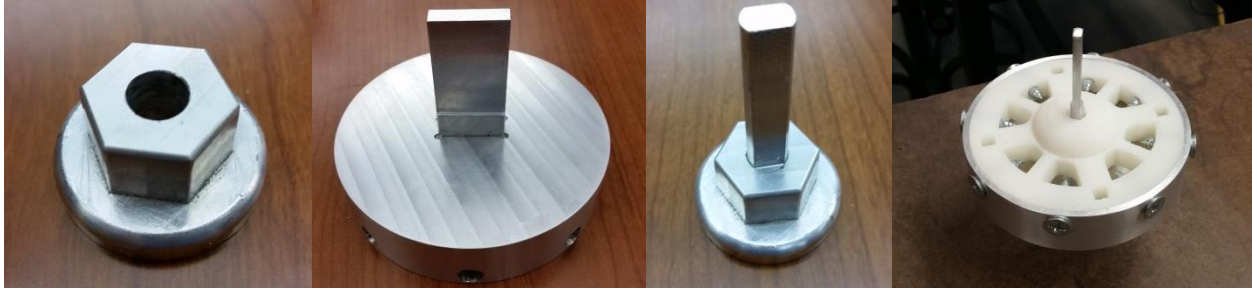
Left to right: Flanged Hexagon, Tension Applicator, and Tension Applicator Assembly
